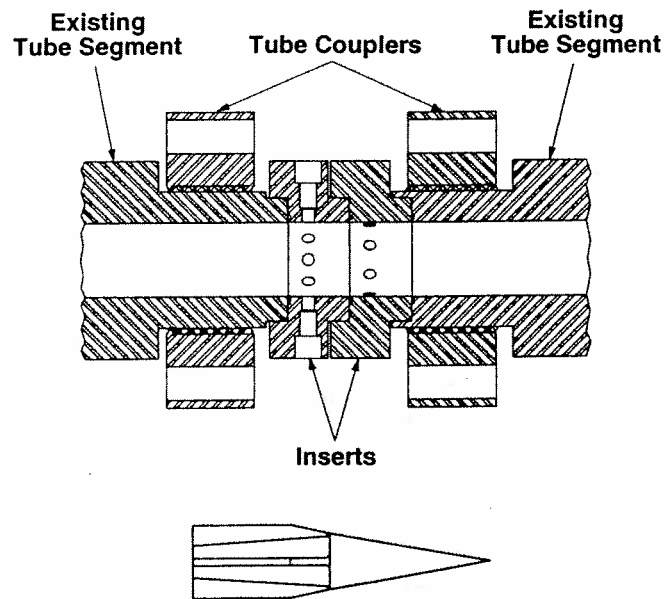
Inserts, tube couplers, and existing tube ends. Projectile shown for scale.
